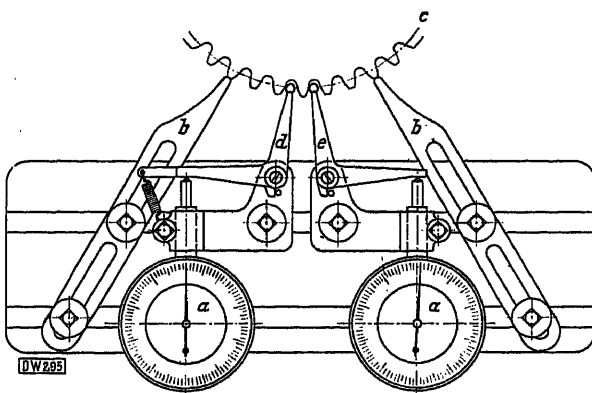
A.E.G., instrument for checking the accuracy of gears
